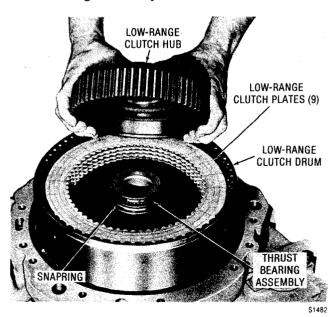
Installing low-range clutch hub (TRT-3 overdrive)
